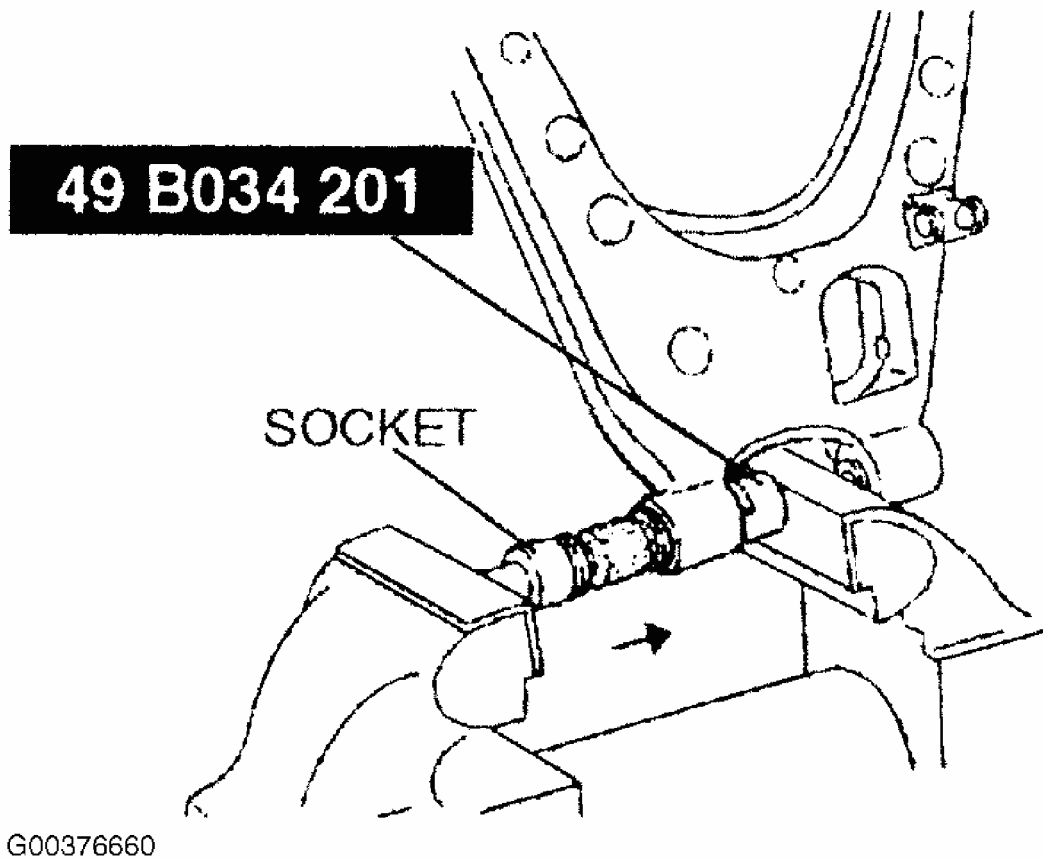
Installing Lower Arm Bushing (Knuckle Side)
